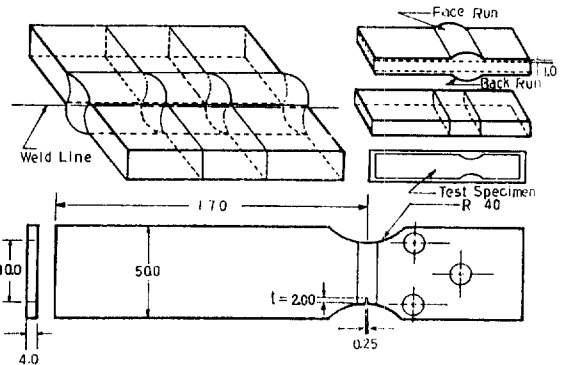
Dimensions of Test Specimen (Unit: mm)
